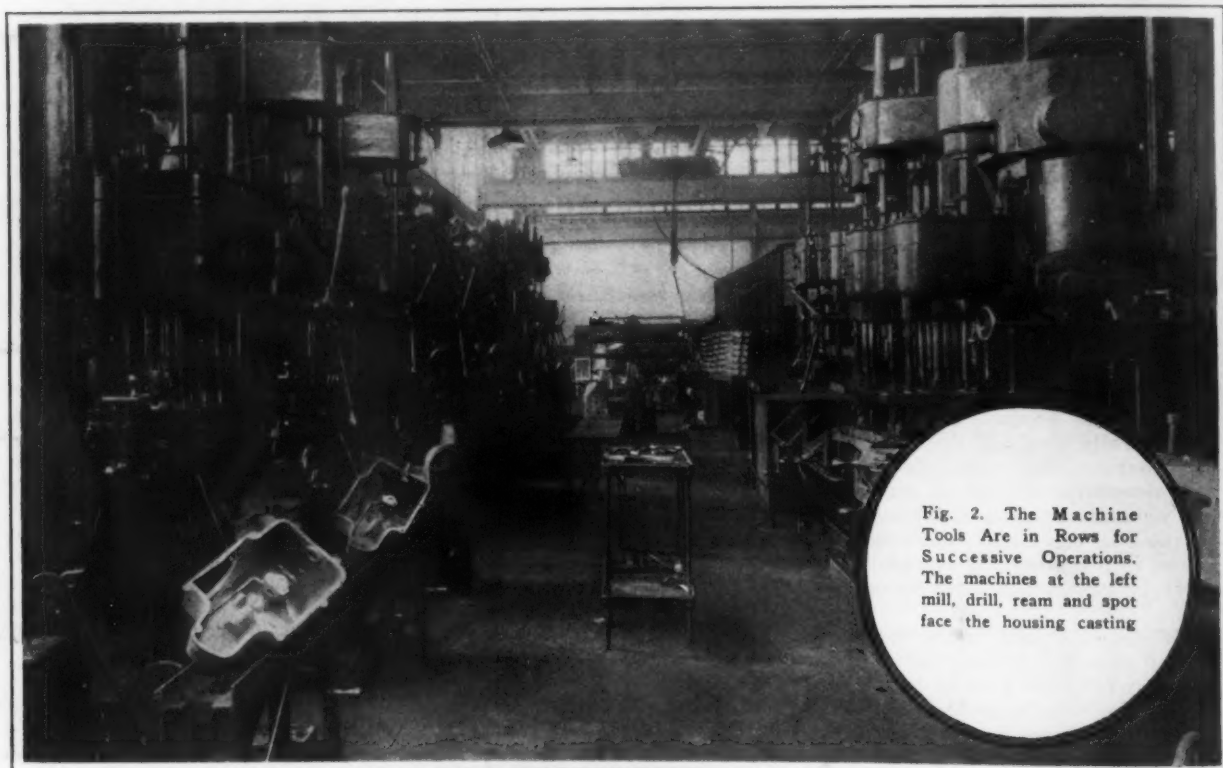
The Machine Tools Are in Rows for Successive Operations. The machines at the left mill, drill, ream and spot face the housing casting
